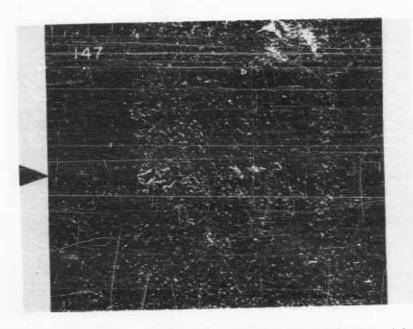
FAILURE IN SPECIMEN NO. 147
